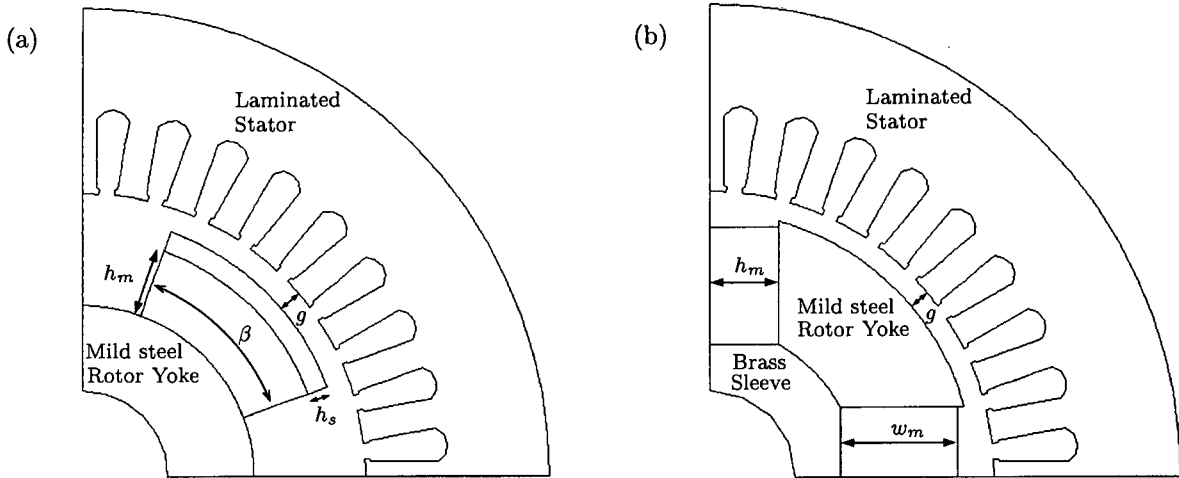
Geometric layout of PM rotors showing design variables for (a) surface PM rotor with a mild steel pole shoe and (b) buried PM rotor
